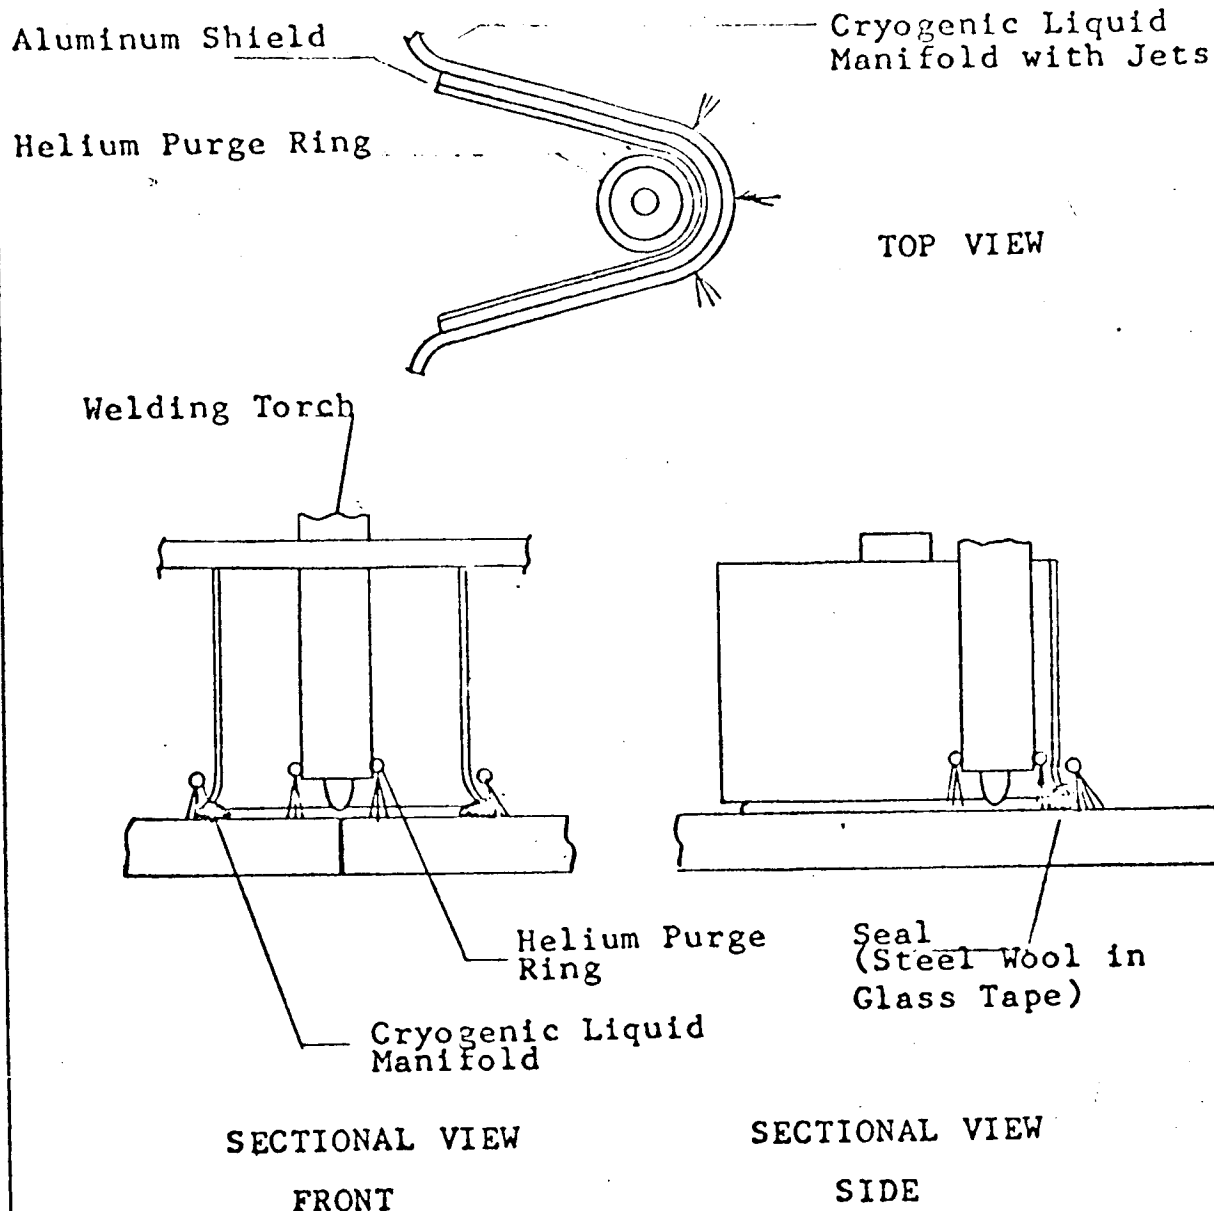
Jet System No. 5 for Front Side Chilling of Weldments using a Cryogenic Liquid — Traveling Shield with Helium Purge Ring
